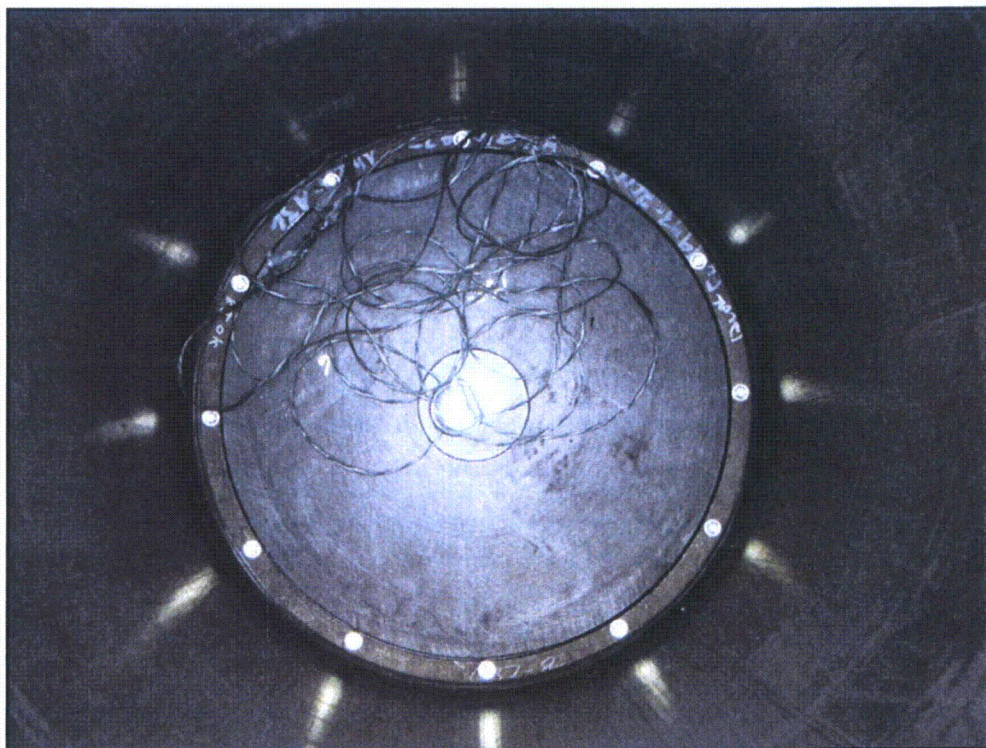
View of NS30 #1 Bottom End Cap from the Lid End of the Shield Body Pipe
